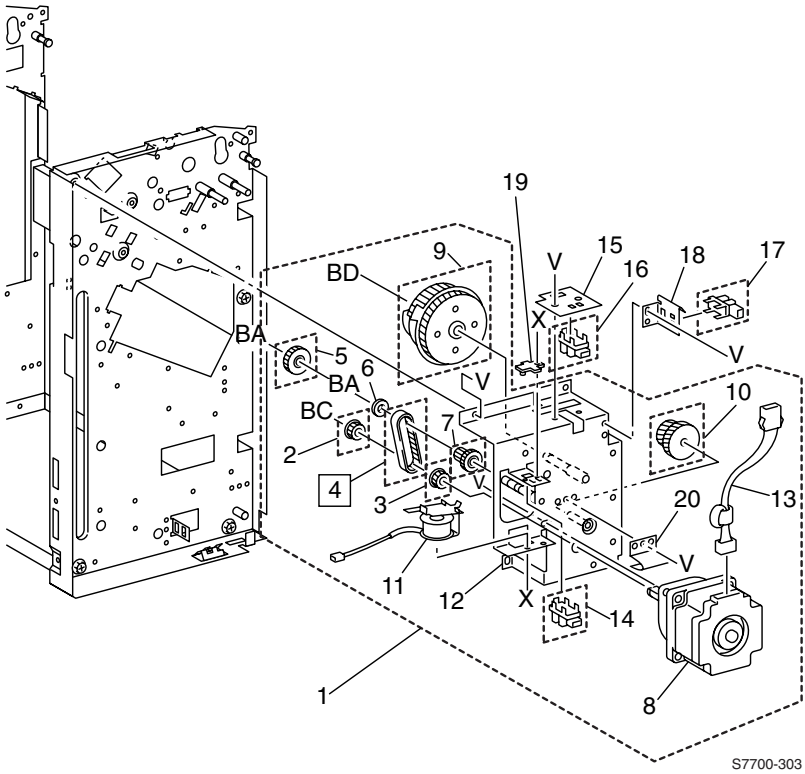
Paper Transport Assembly FRUs (cont'd.)
